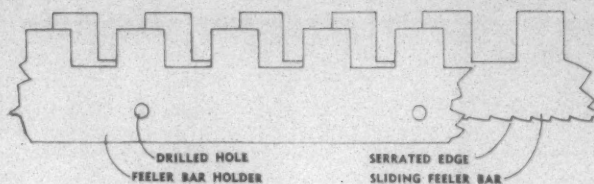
Holes drilled in the feeler bar holder and serrated bottom edge of the sliding feeler bar help keep the bars free of lint and dirt.
